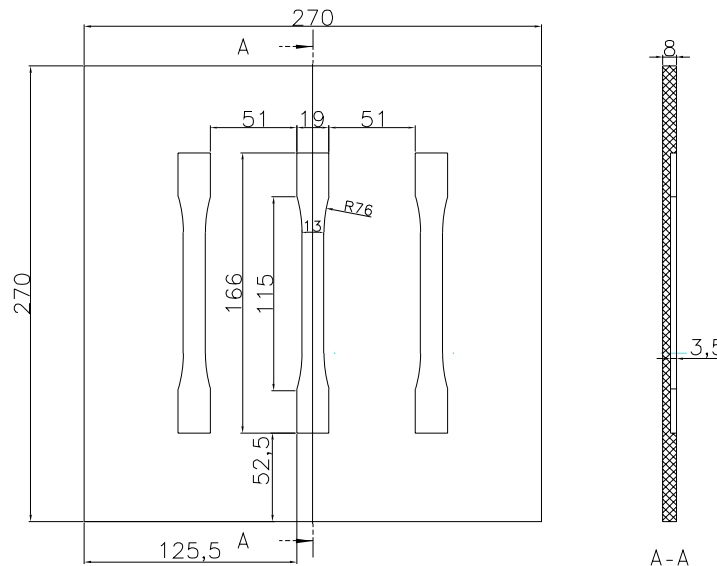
Geometry and dimensions of the mold for making epoxy specimens. (All dimensions are in mm).
